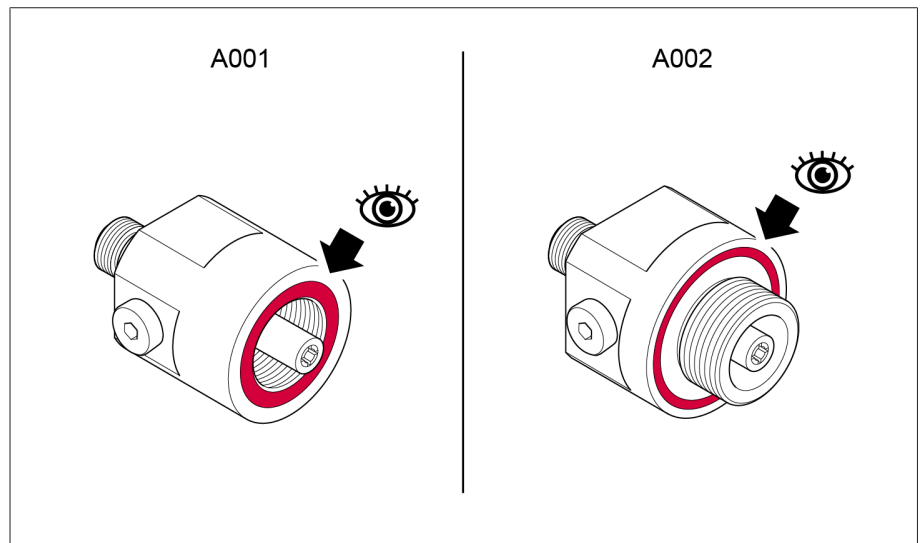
Checking the sealing ring (example illustration bushing adapter A001 and A002)
